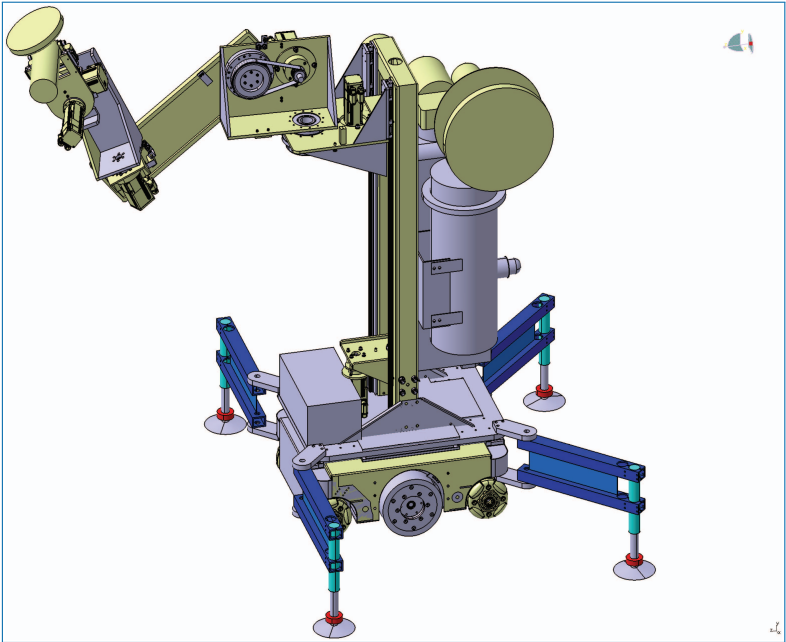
Flat alignment of front stabilizers for getting closer to the wall.
